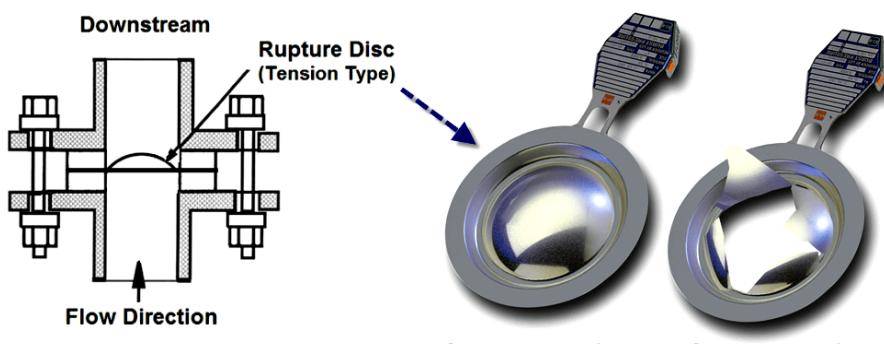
Forward-Acting Solid Metal Rupture Disk Assembly
